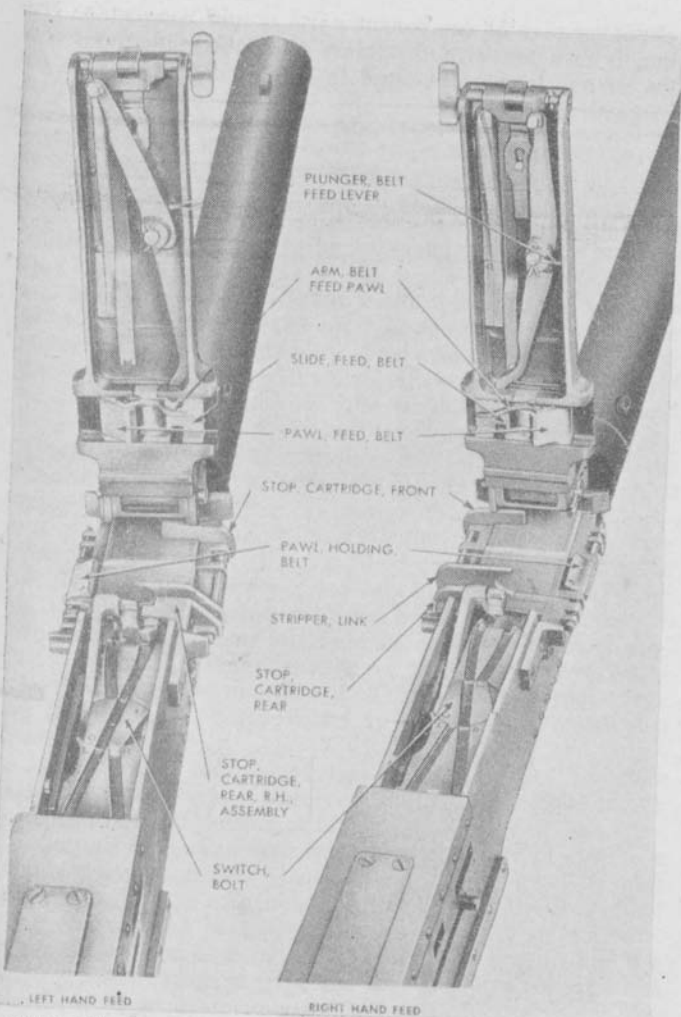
Arrangement of parts for right- and left-hand feed.
